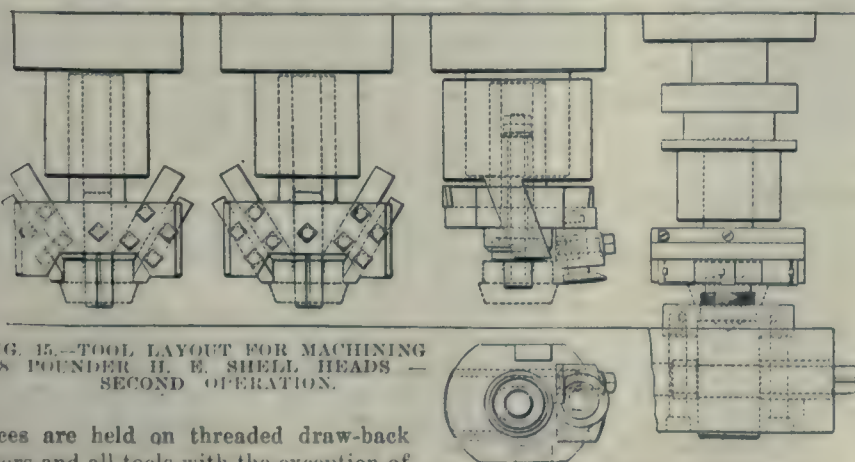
TOOL LAYOUT FOR MACHINING 18 POUNDER H. E. SHELL HEADS — SECOND OPERATION.
